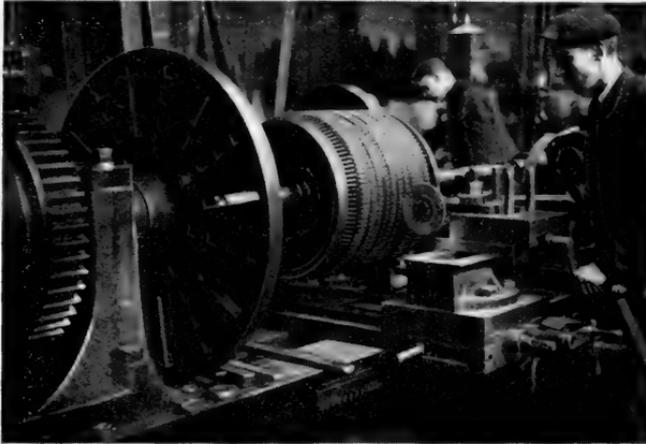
Grinding Surface of Induction Motor Rotor.
